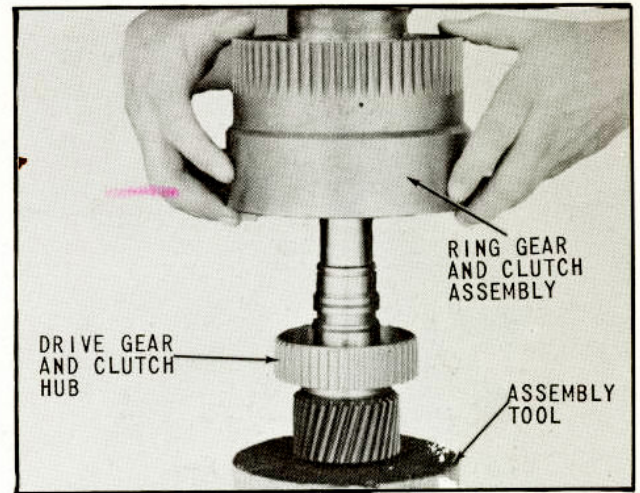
Assembling Ring Gear and Clutch Assembly on Drive Gear
